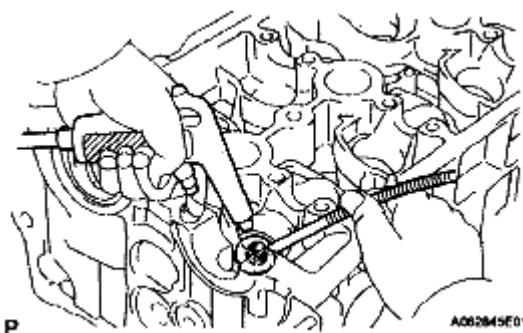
Removing Valve Spring Seats Using Compressed Air
